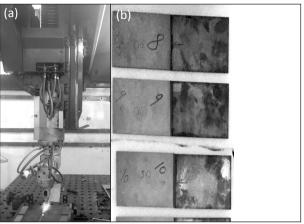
(a). LBW expermental process and (b). welded work piecess.
